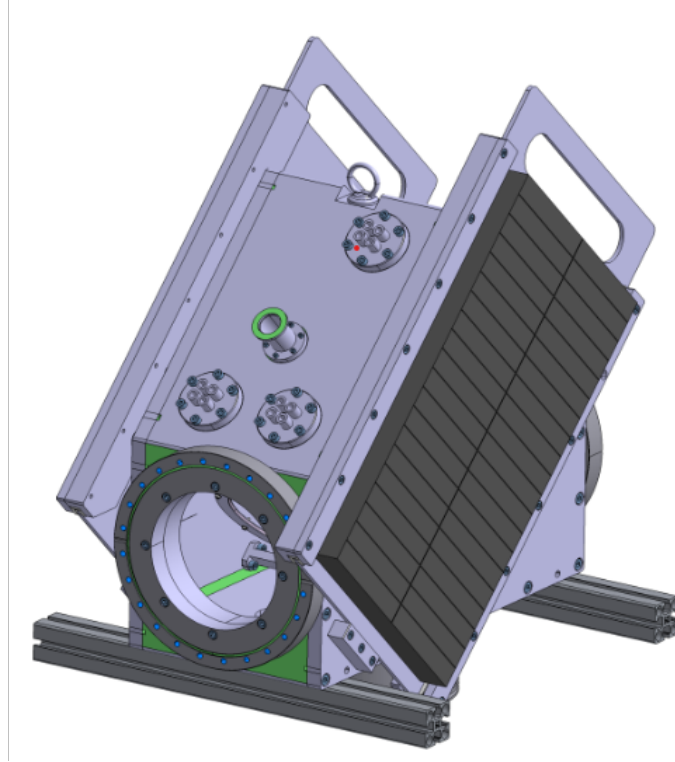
CAD drawing of MCP detector system including black magnet array blocks along drift volume length Horizontal volume connected to main SDB vacuum chamber with flanges and encloses a SDB emissive foil. CAD drawing courtesy of University of Koeln workshop.
